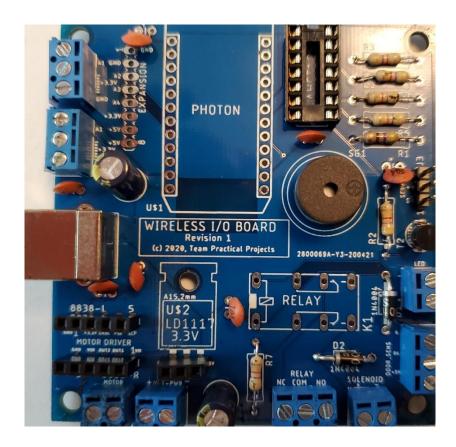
Motor Controller Female Headers Soldered to Board.
